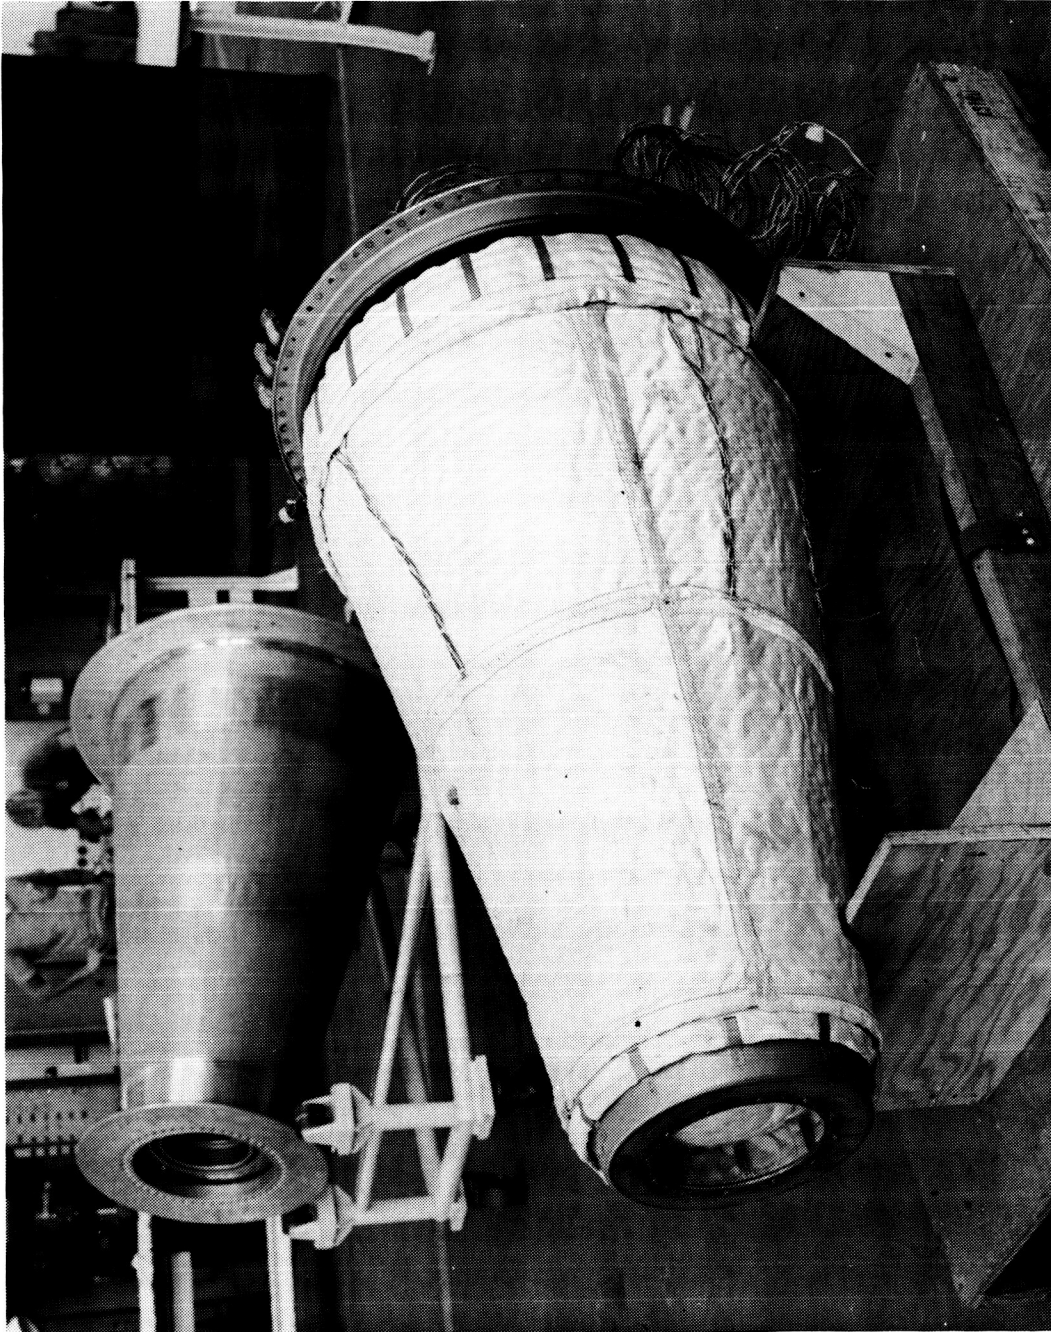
Completed Tank Primary Assembly Prior to Mating
